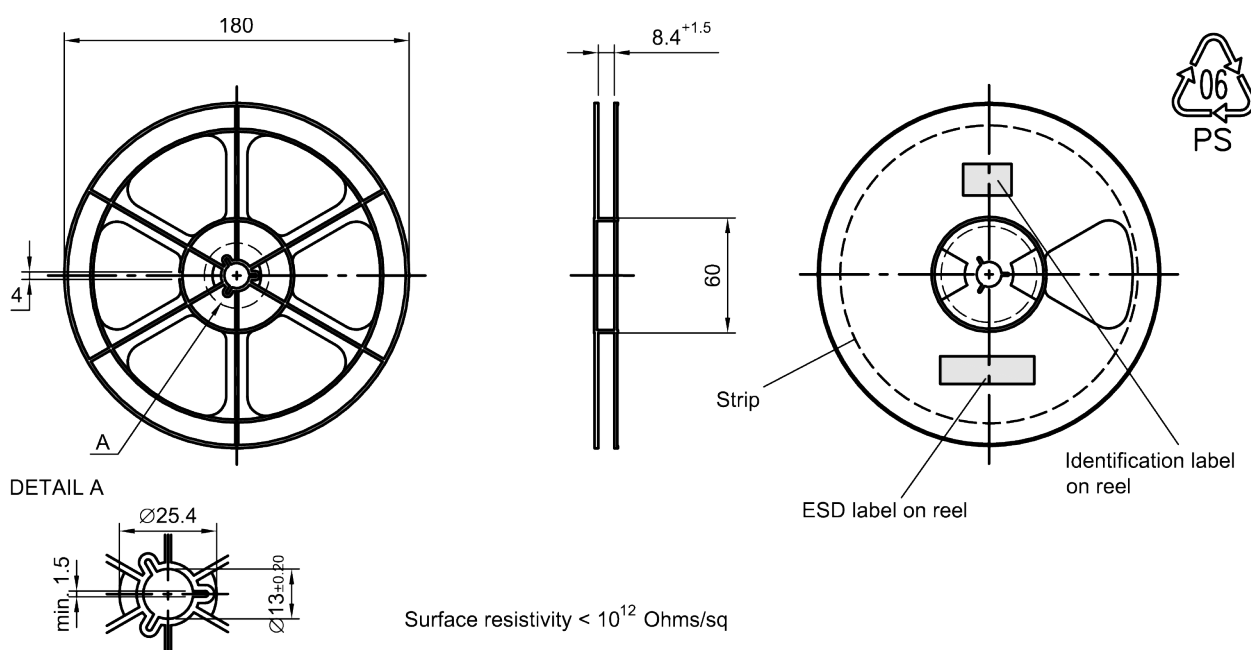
Drawing of reel (first-angle projection) with diameter of 180 mm.
